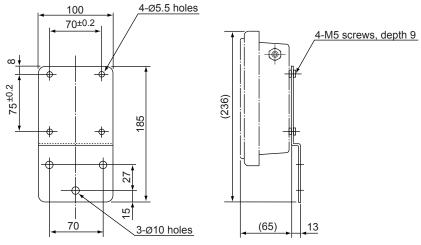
External Dimensions 2 of WTB10-PH Terminal Box
